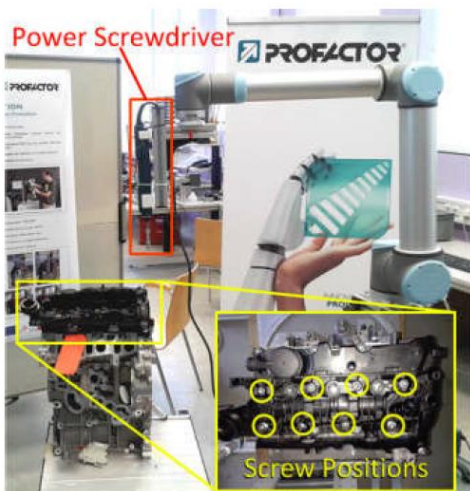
Usecase Combustion Engine Assembly – screw positions to be parameterized by the user.
